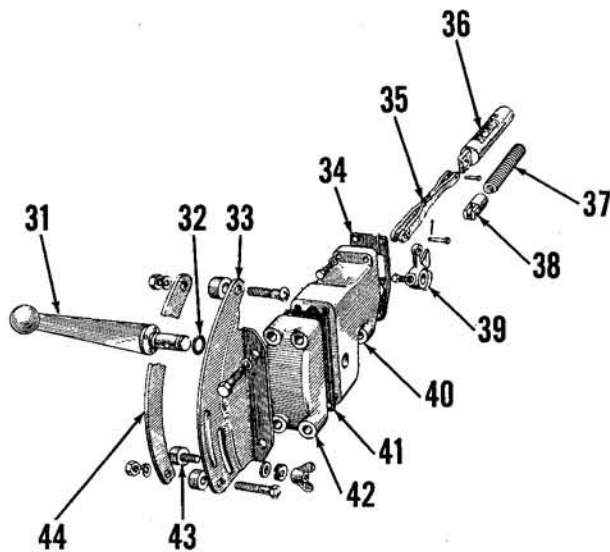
Exploded view of control lever, support and control valve unit; refer to Fig. 181 for view showing unit split from valve housing.
